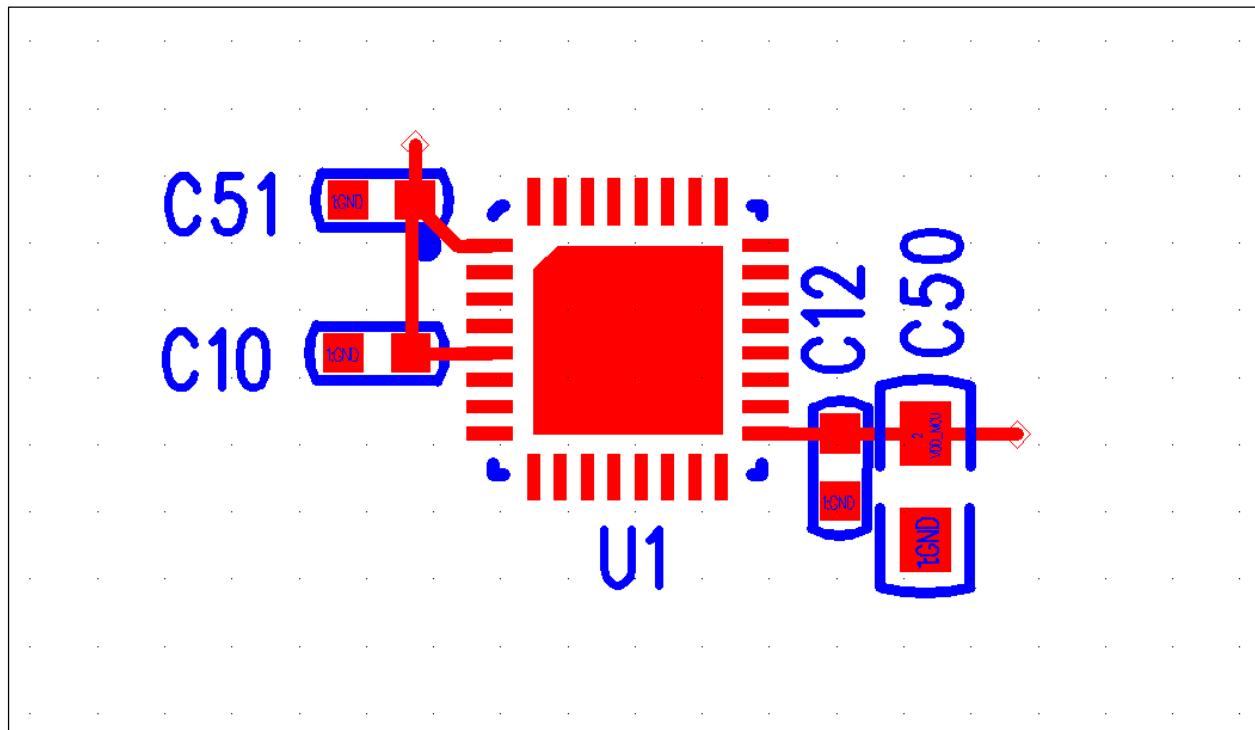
N32G033 Series QFN32 Package PCB LAYOUT Reference Diagram
